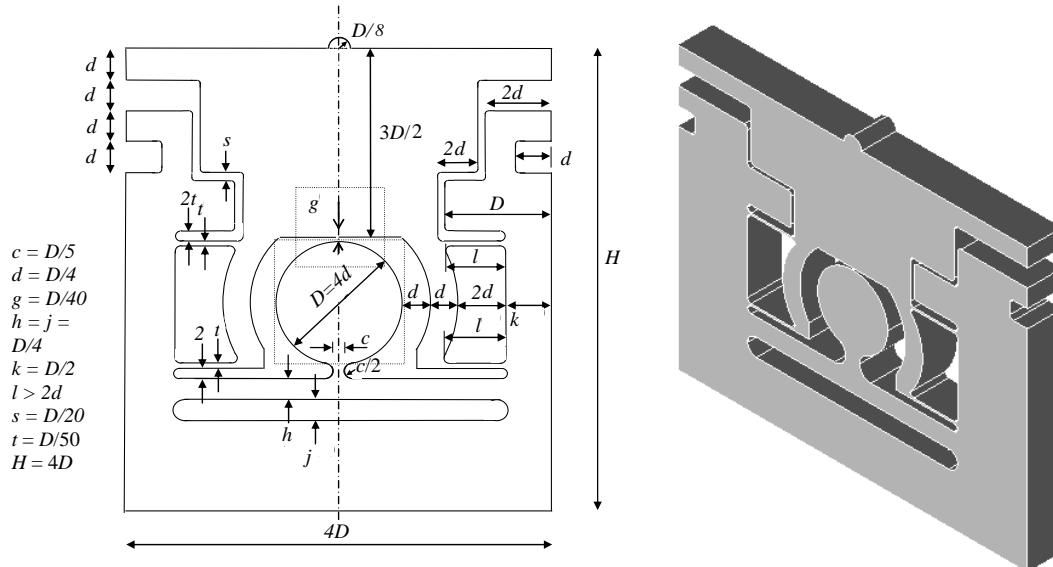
Schematic and solid-model drawing of the prototype standardized test specimen.
